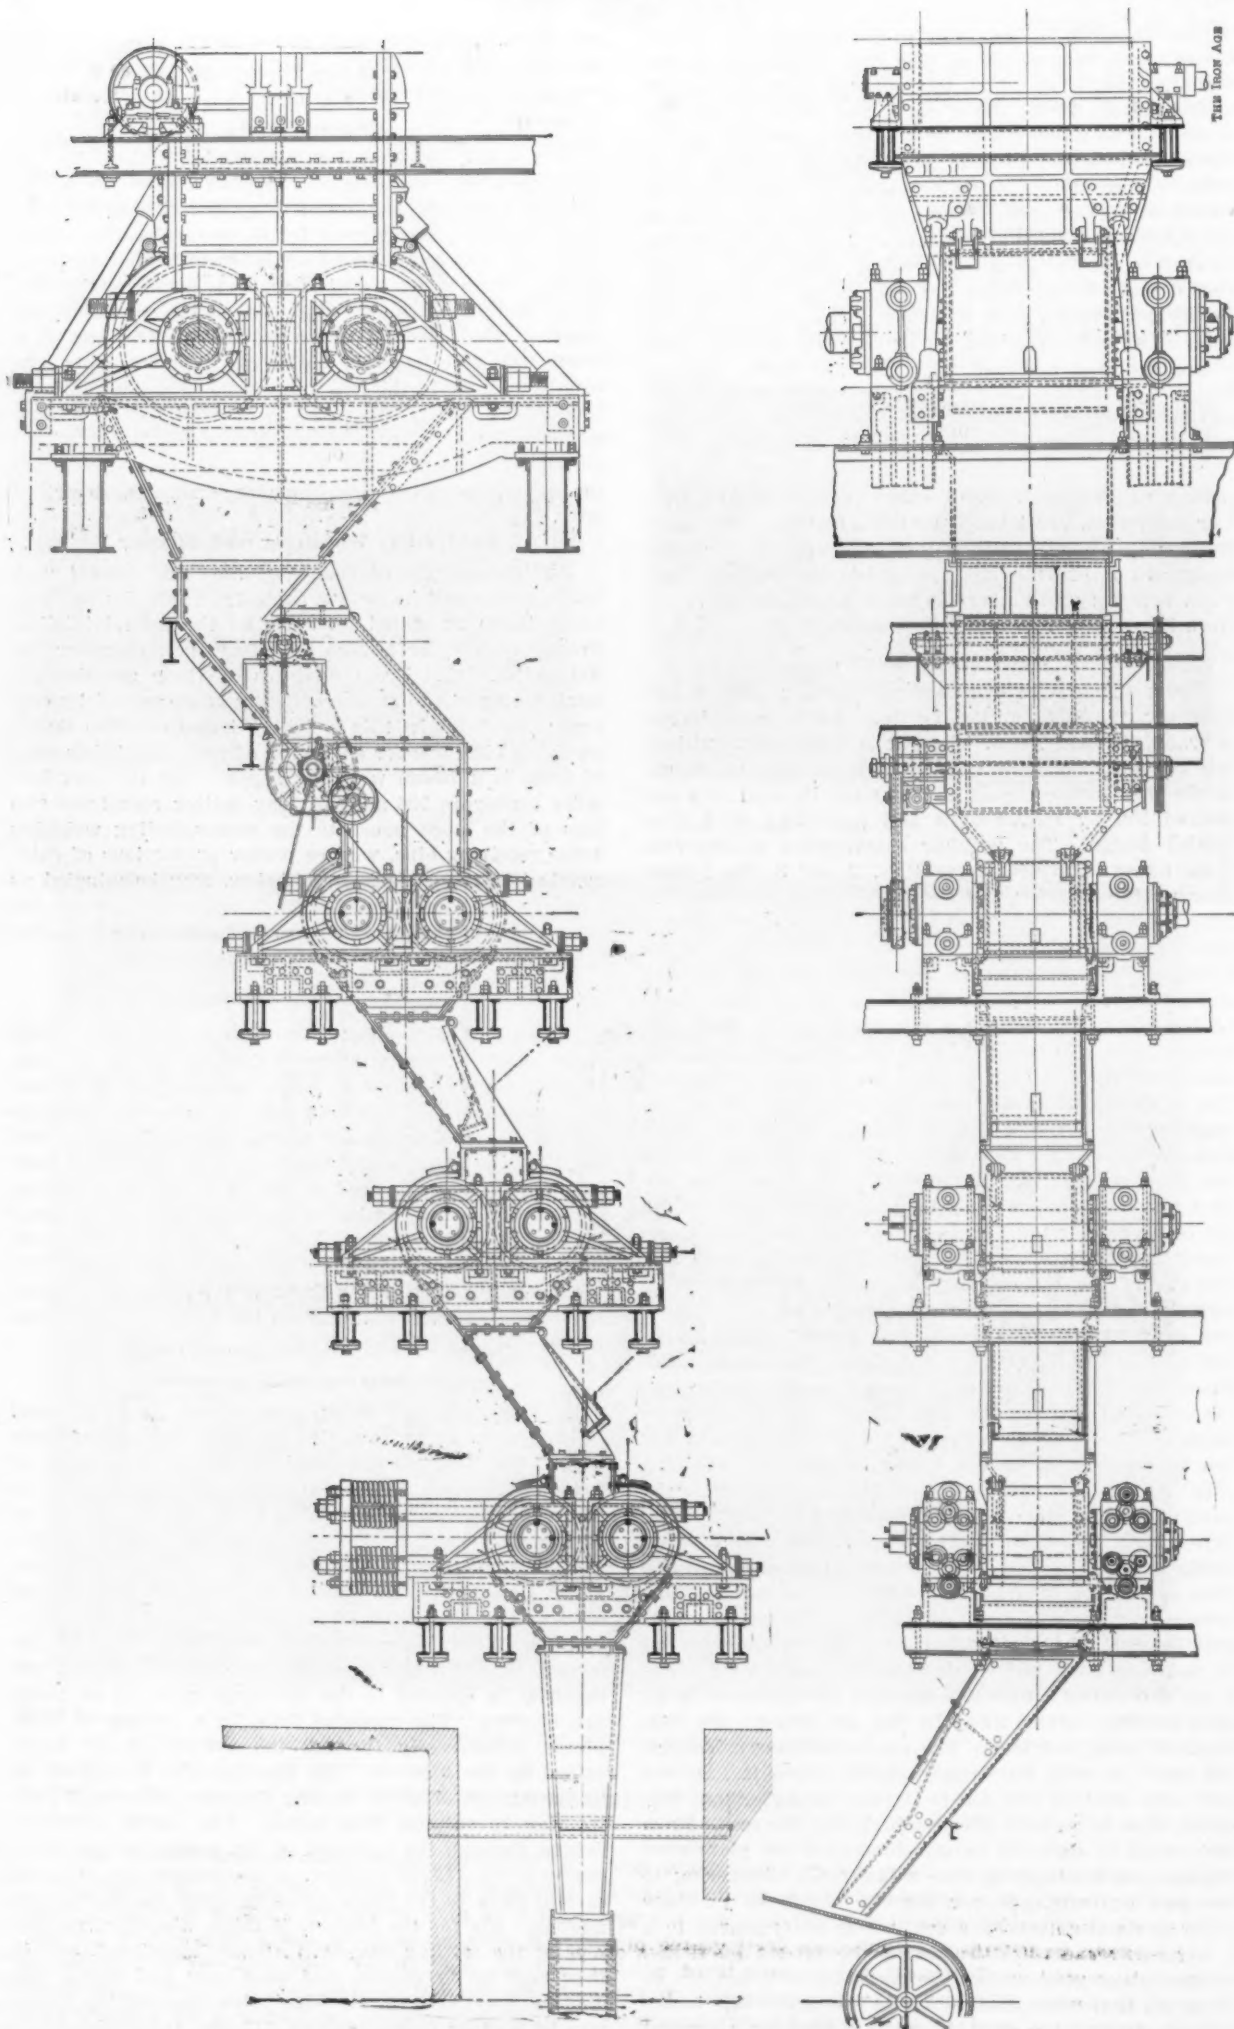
Elevations of Rock Crushing System, Giant Rolls at Top.
